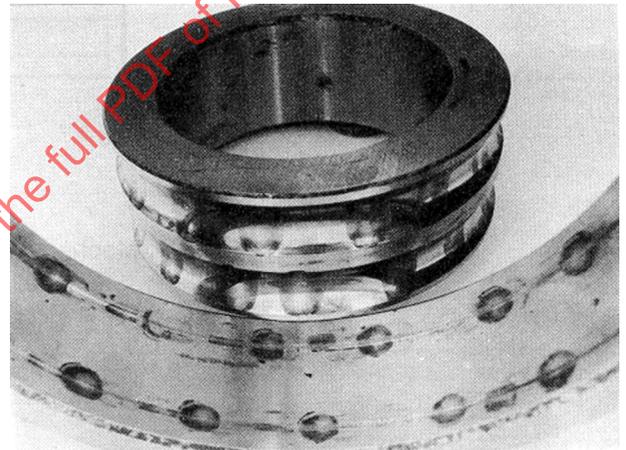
Contact corrosion on a ball bearing inner ring and outer ring raceways
